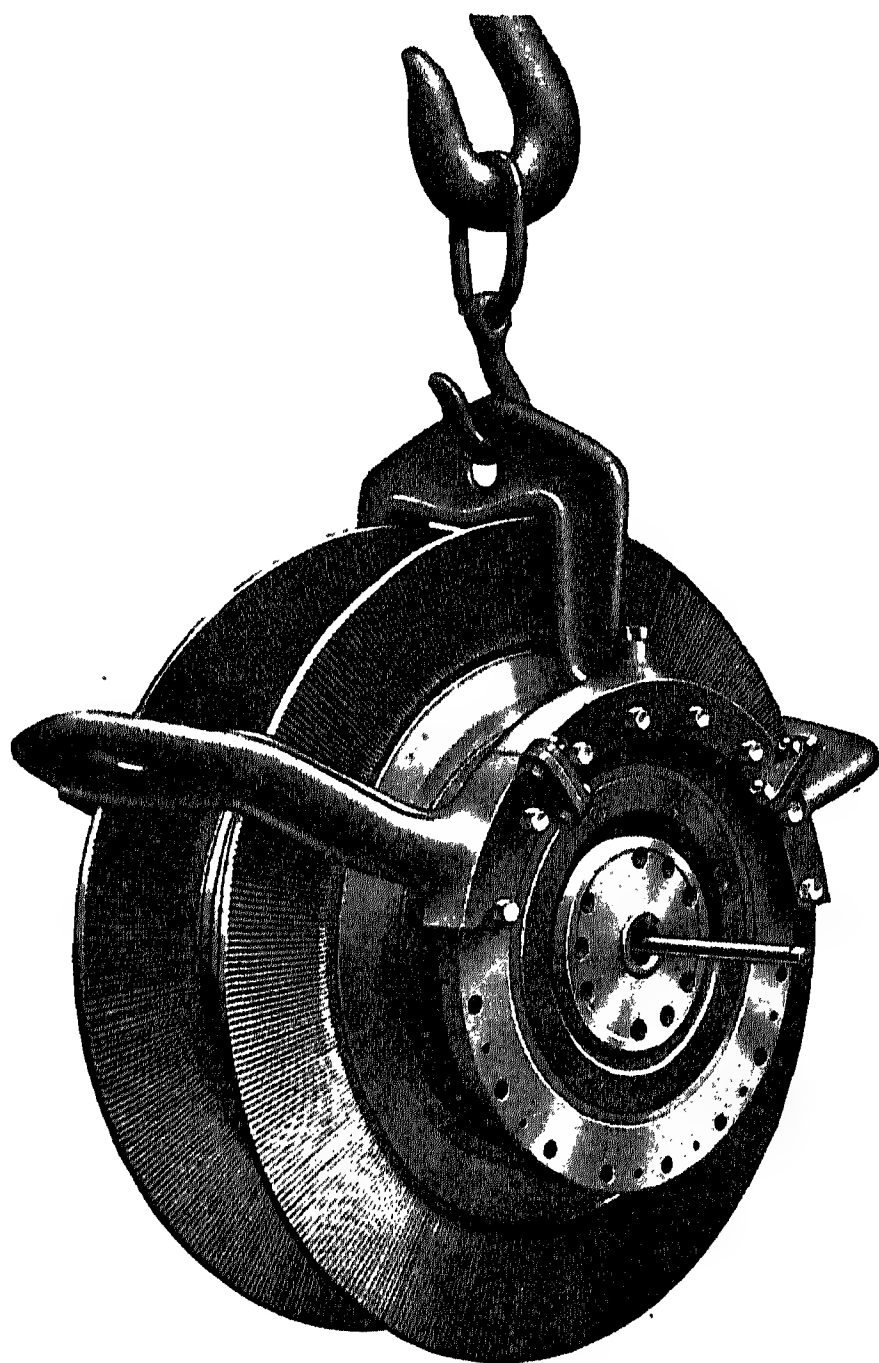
Special Lifting Stirrup for 5000-Kw. Ljungström Turbine Rotors
